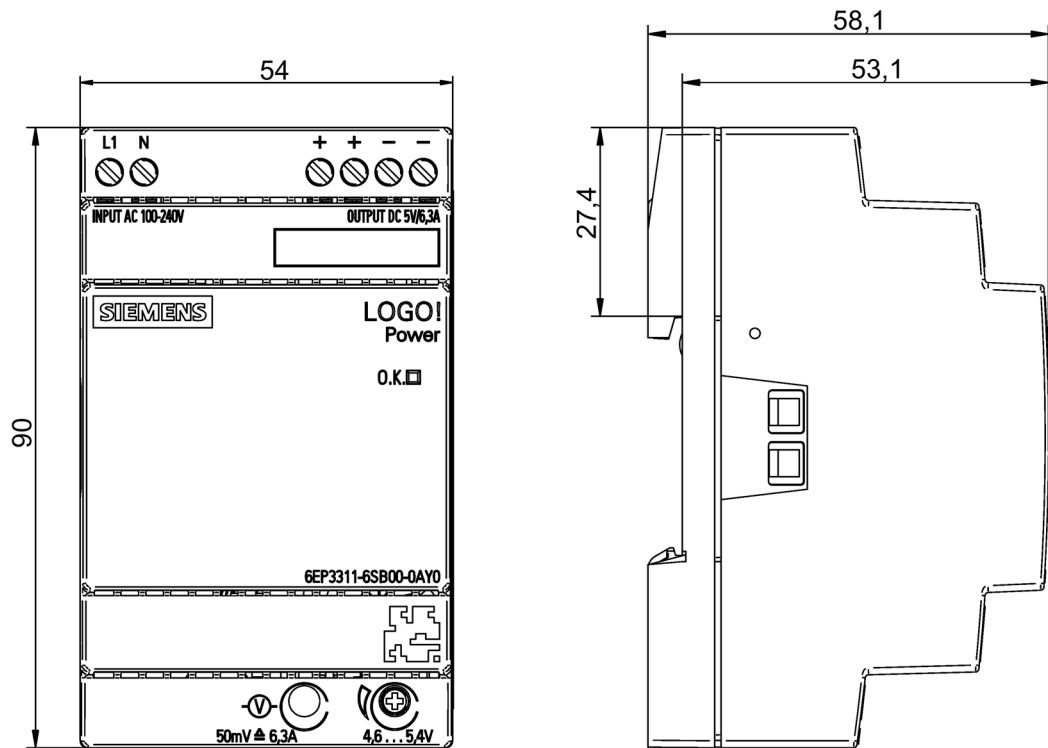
Dimension drawing for 6EP3311-6SB00-0AY0, 6EP3322-6SB00-0AY0, 6EP3322-6SB10-0AY0 and 6EP3332-6SB00-0AY0
